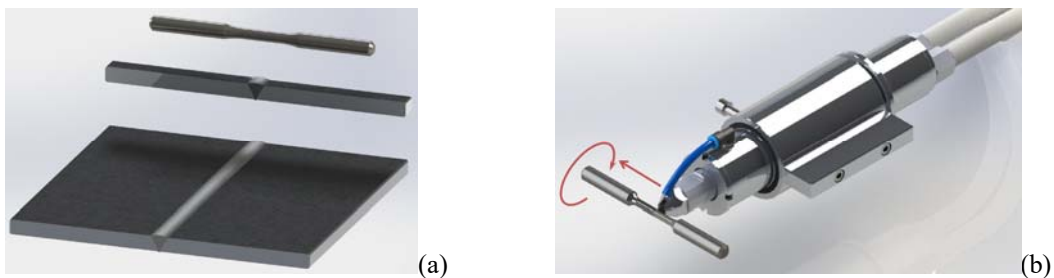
Manufacturing of specimens from Strenx welded sheet metal (a) and UIT surface treatment (b).
